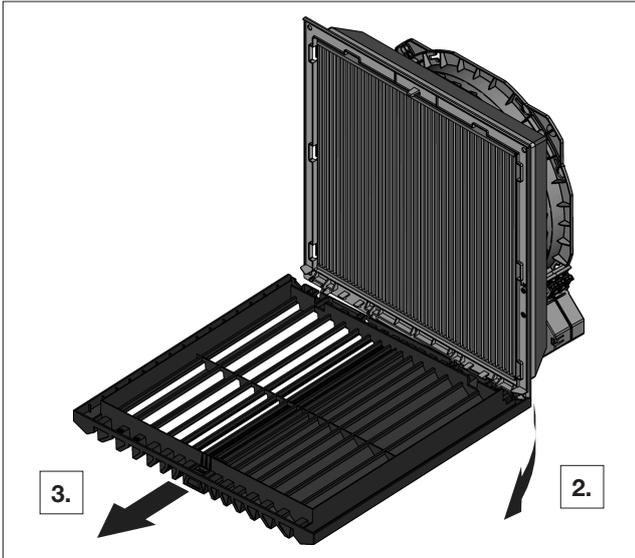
Release the r/h side of the hinge and remove the louvred grille (3239.xxx to 3244.xxx)
